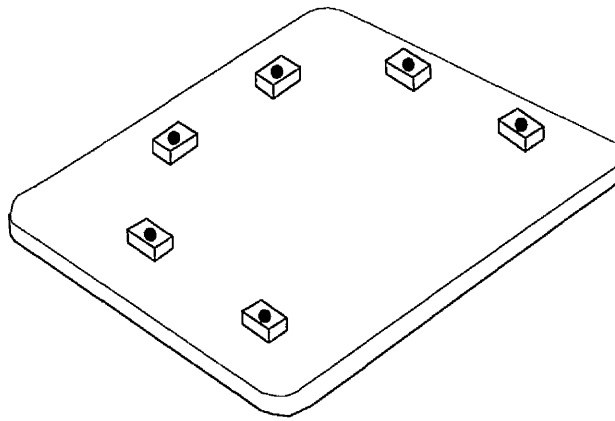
Final Installation of Floor Panels Around Galley Attachment Fittings
